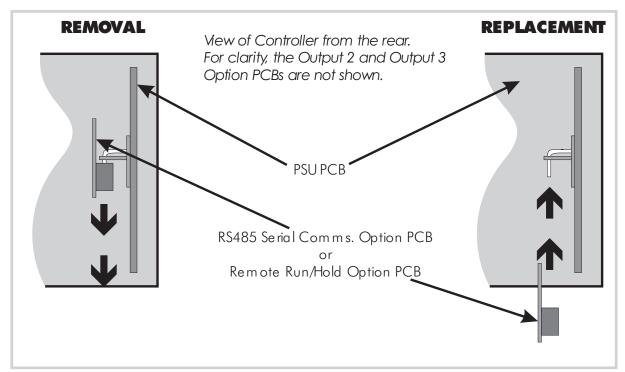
Removing the RS485 Communications Option PCB or the Remote Run/Hold Option PCB
